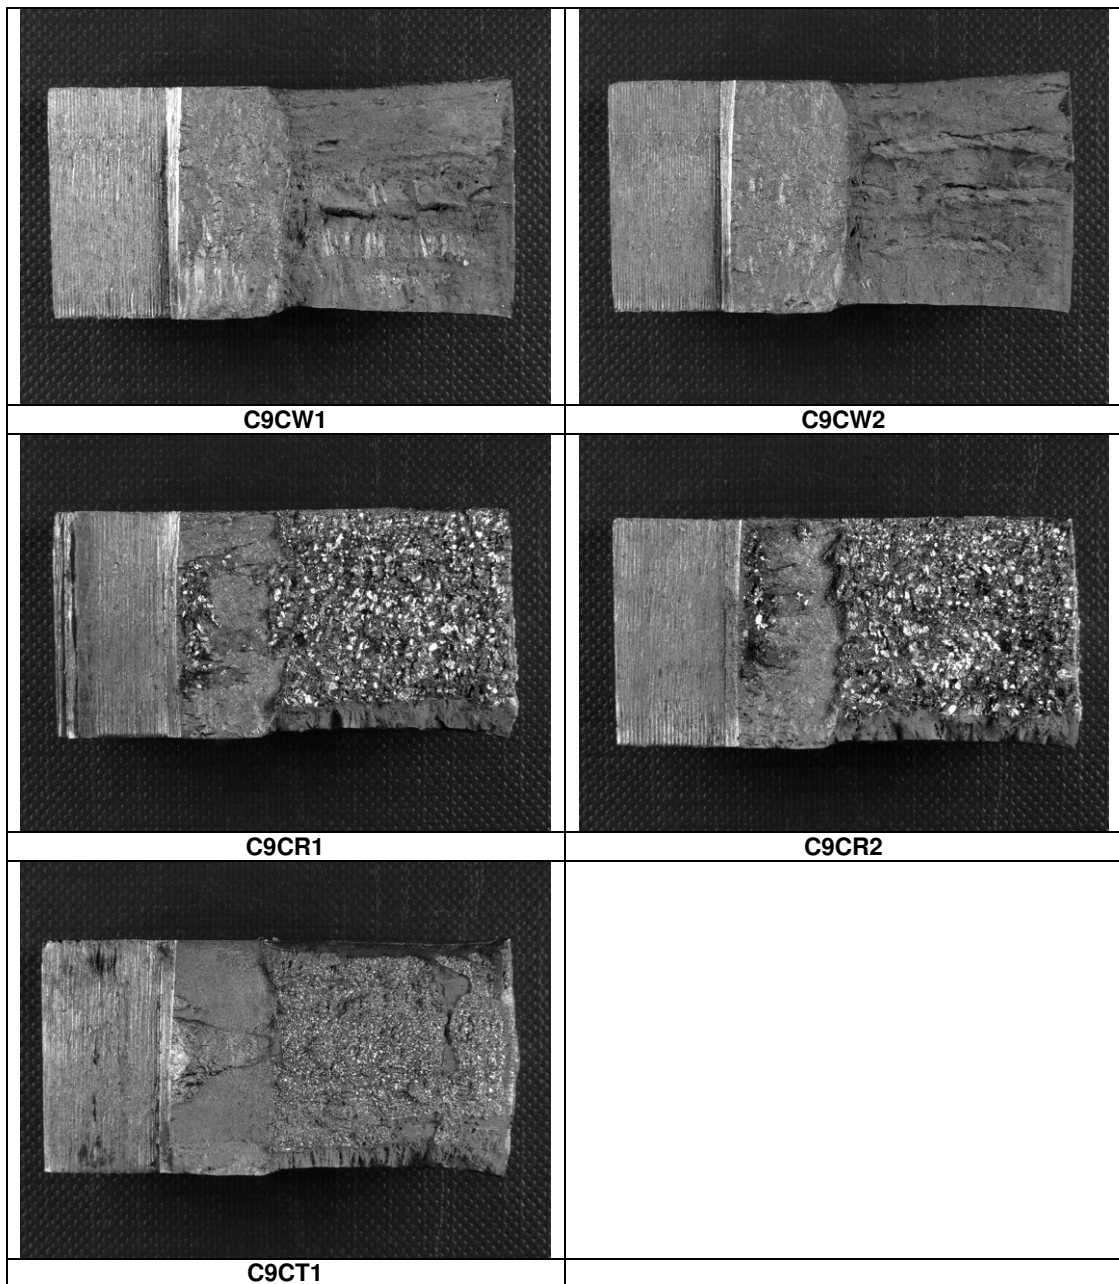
Fractographs of CTOD samples from 20 mm thick SAW weld (C9).
